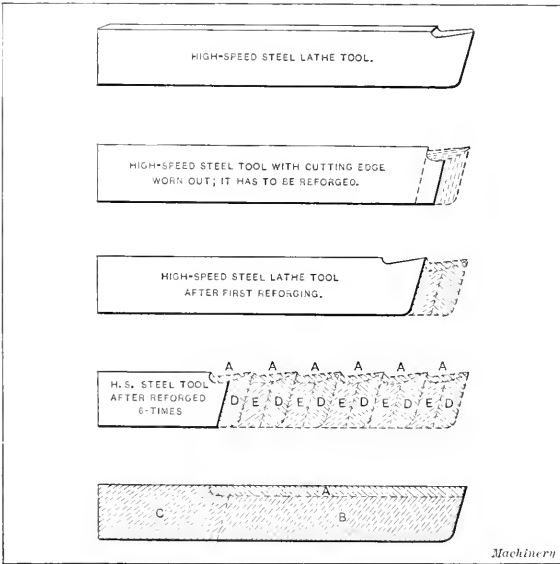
Diagram showing reduction of a Lathe Tool in reforging and grinding
